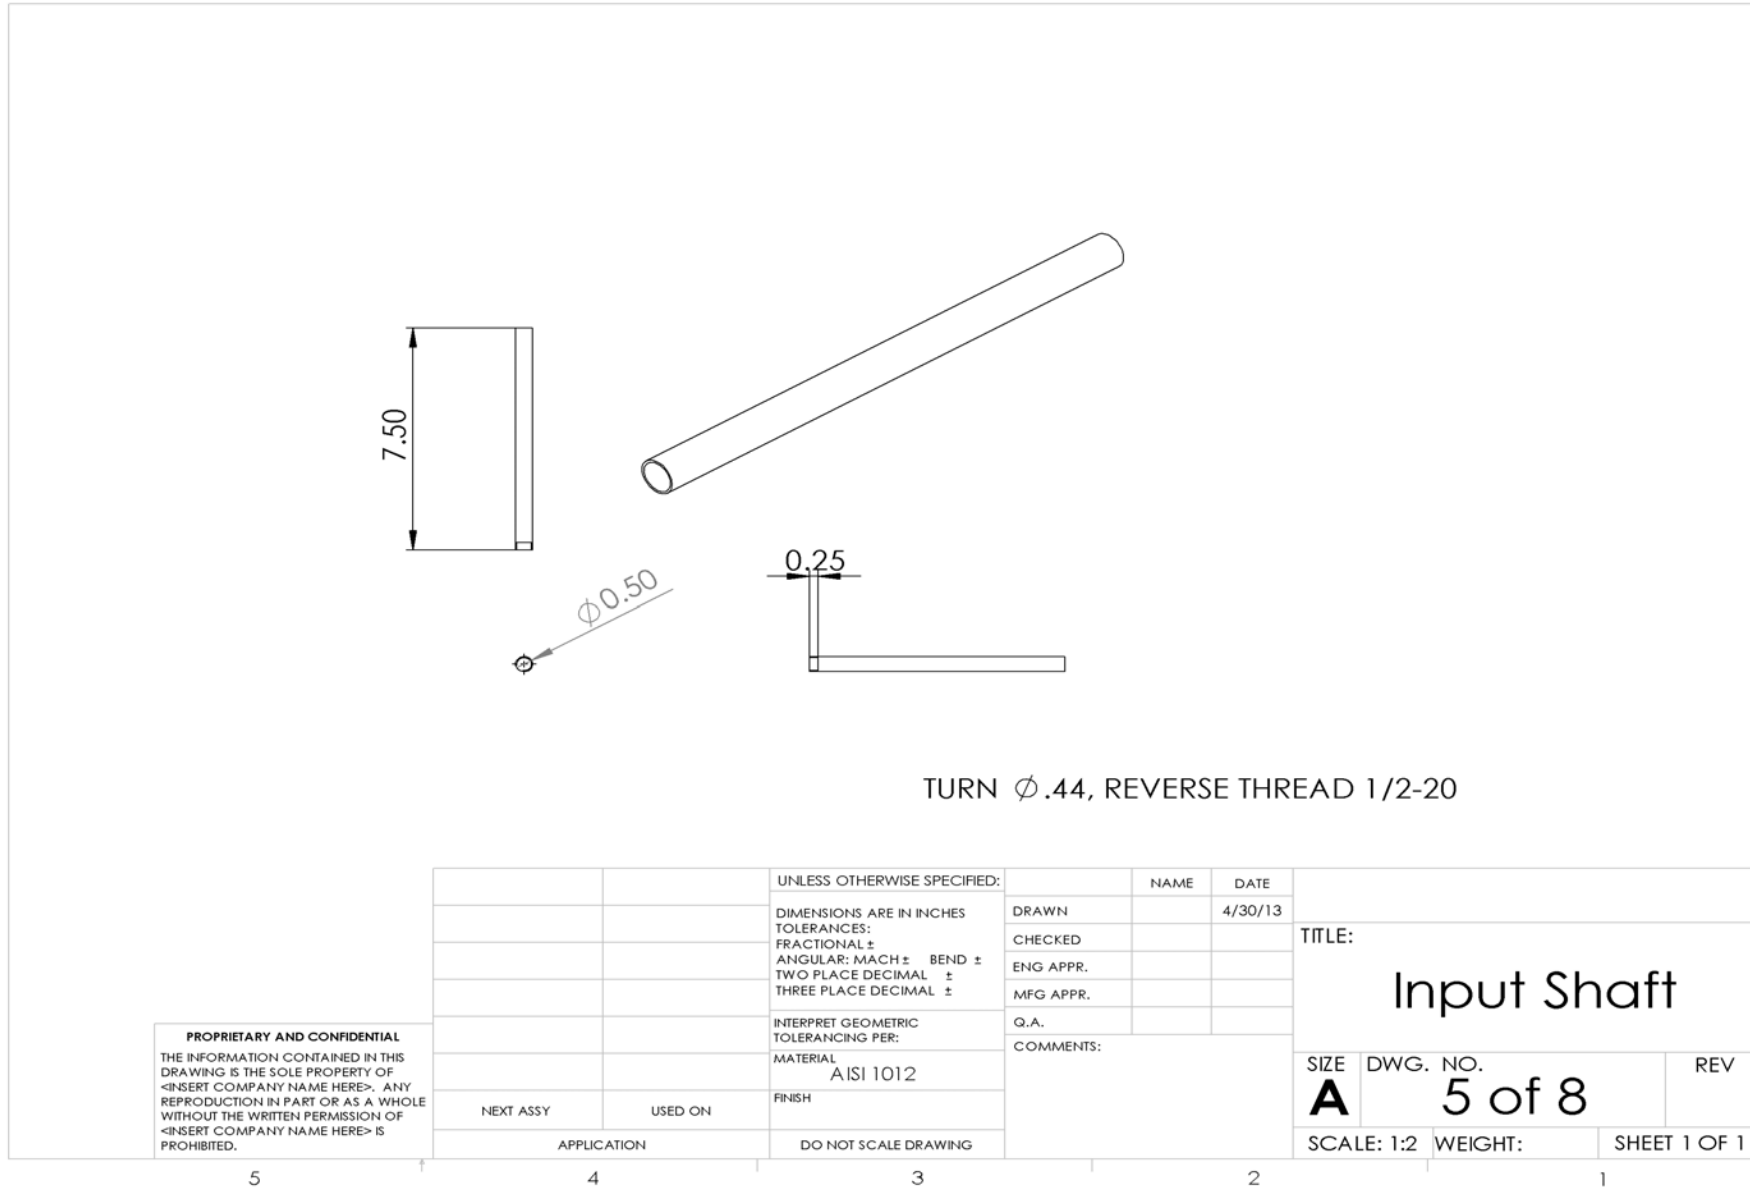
Input Shaft*. This part will connect to the roller locks and the provided gear and will fit in the ball bearing in the back plate. It will turn when the gear turns due to the wind turbine, and will thus rotate the roller locks so that the rollers roll and squeeze the tubes.
